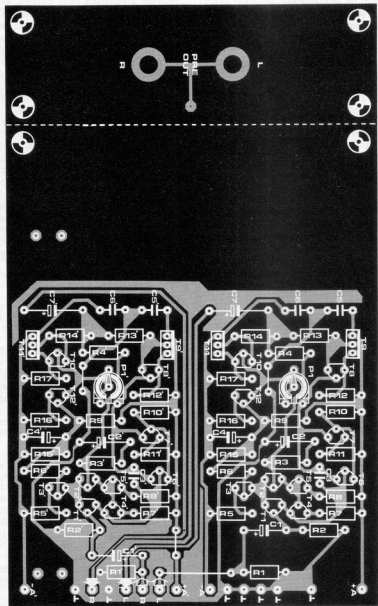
The printed circuit board for the line amplifier consists of two sections; these must be separated before any components are mounted, and the smaller section that accepts the output sockets is mounted at right angles along the rear edge of the main board. Note that the connections from the bus board to the output sockets must be made with screened cable, running along the lower edge of the module; two pairs of solder pads are intended for mounting wire bridges to hold the cable neatly in position.
